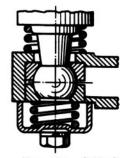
Self-adjusting socket joint. The sheet-metal spring cover is held in place by two screws.
